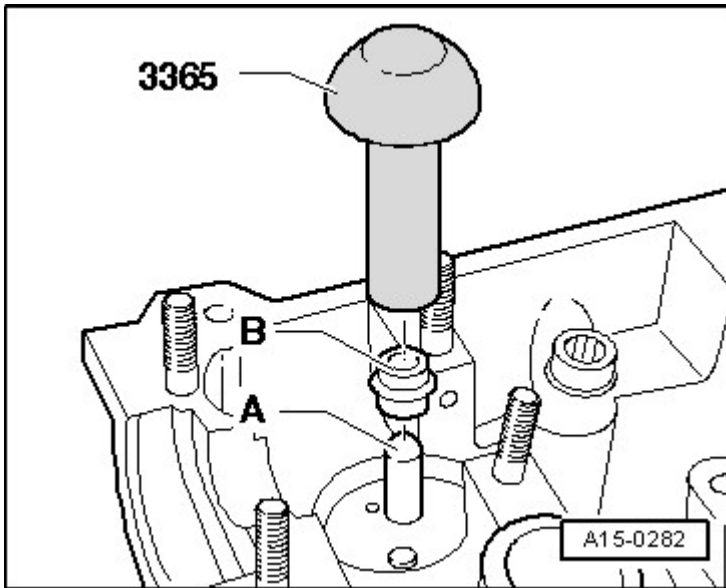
Identifying Plastic Sleeve, New Valve Stem Oil Seals & Valve Stem Seal Driver 3365
